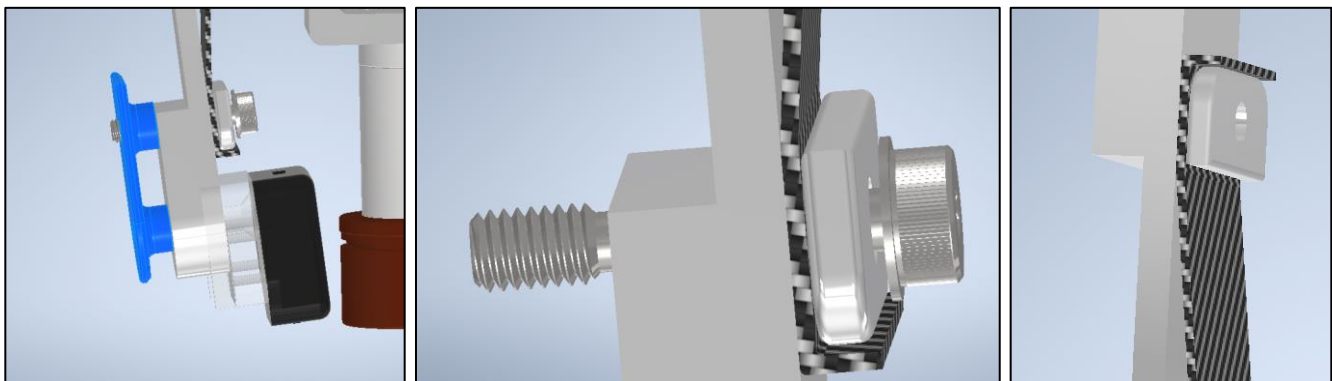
Change to the carbon fiber strut attachment. Modification to the bottom end of the struts is shown. A shoulder bolt goes all the way through the AI strut, carbon fiber strut, and restraint plate. The black box is the bottom IMU sensor (discussed below).
